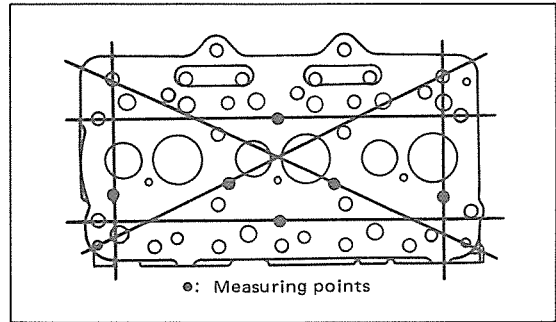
B.88 Measuring Points of Cylinder Head Flatness
